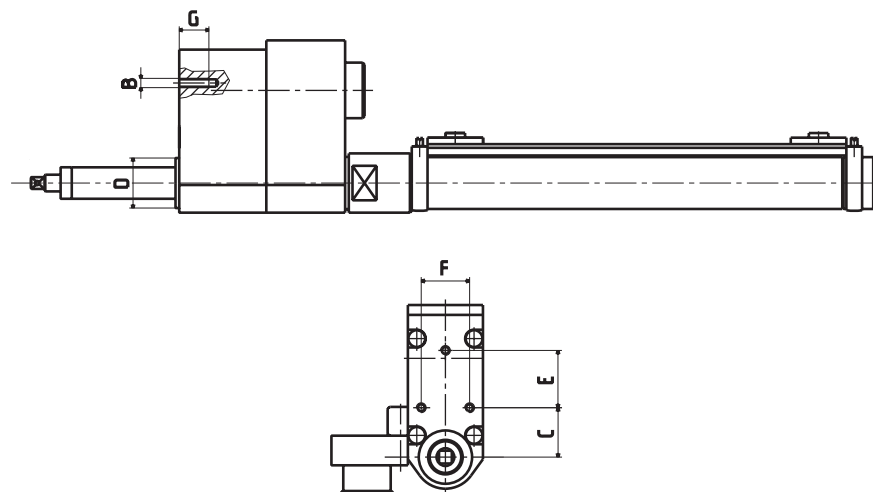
Main dimensions for the installation on a mounting plate (feed output drive)
